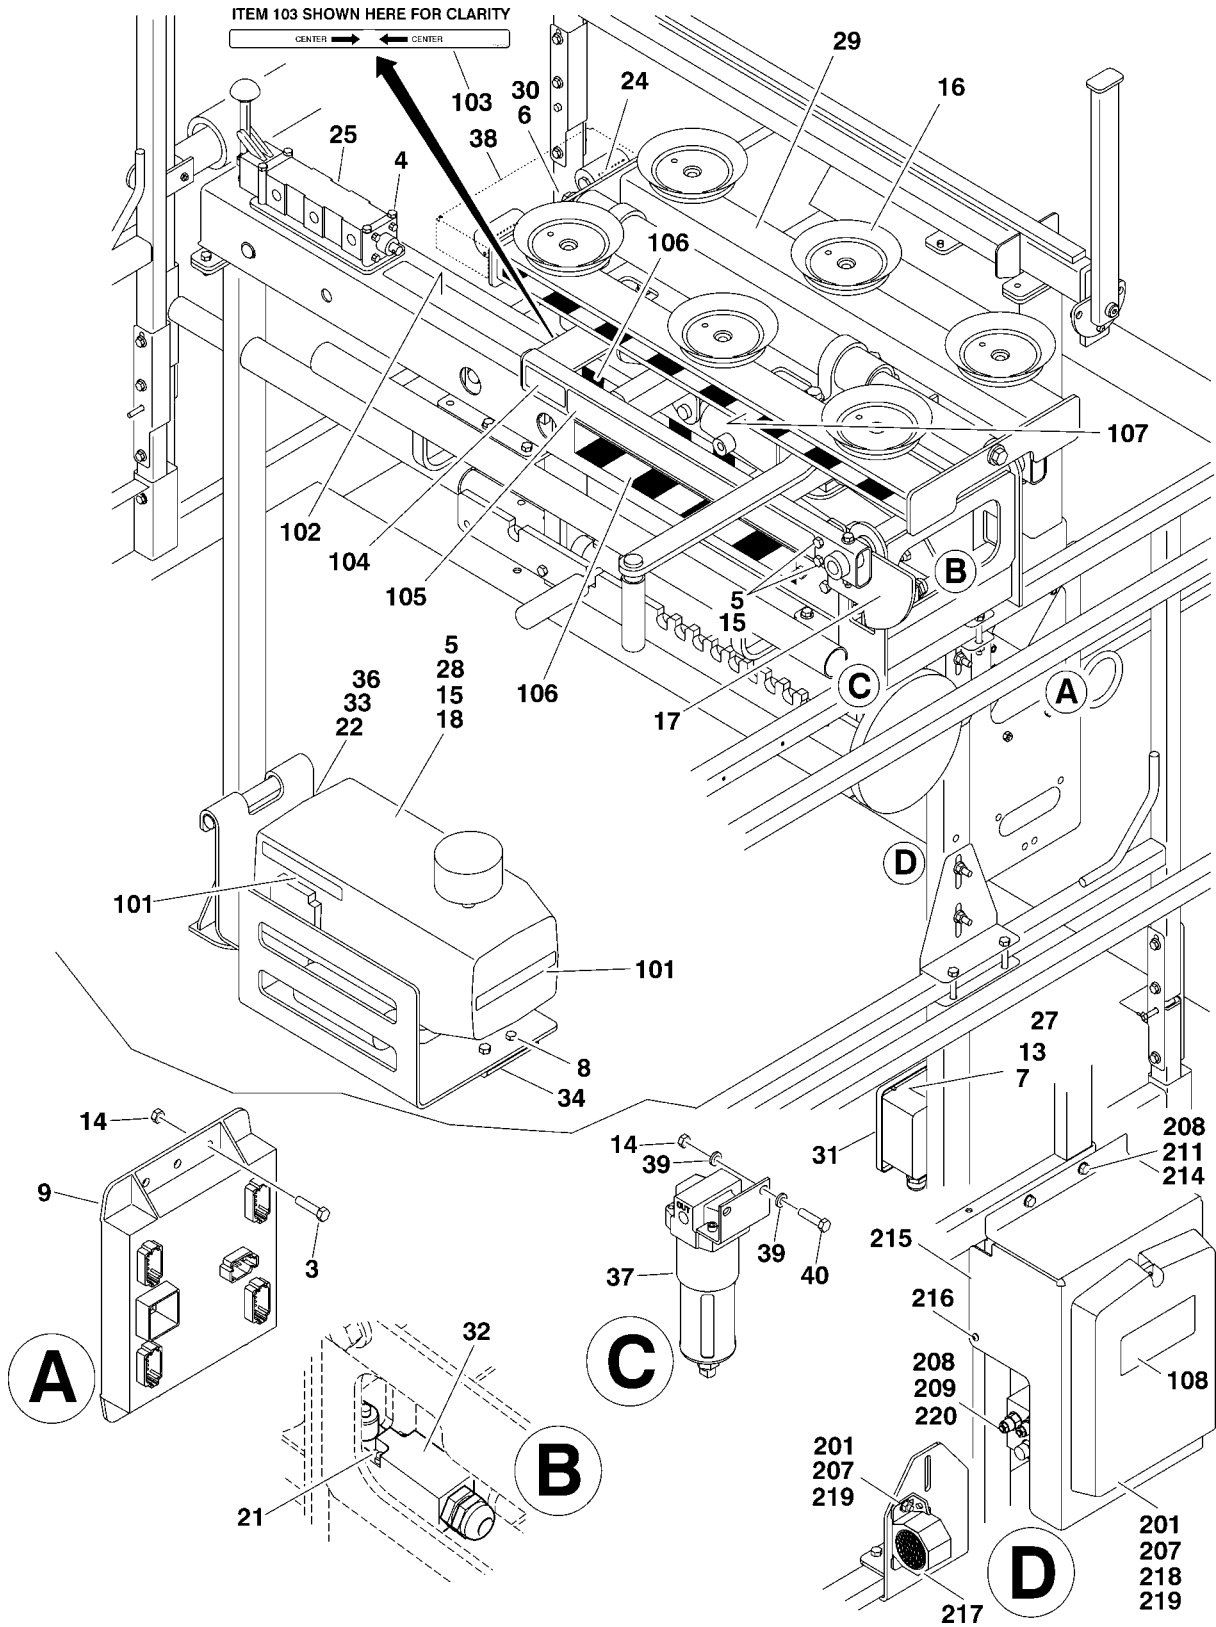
Easi-Cladder™ Plus Vacuum Arms Parts Drawing
